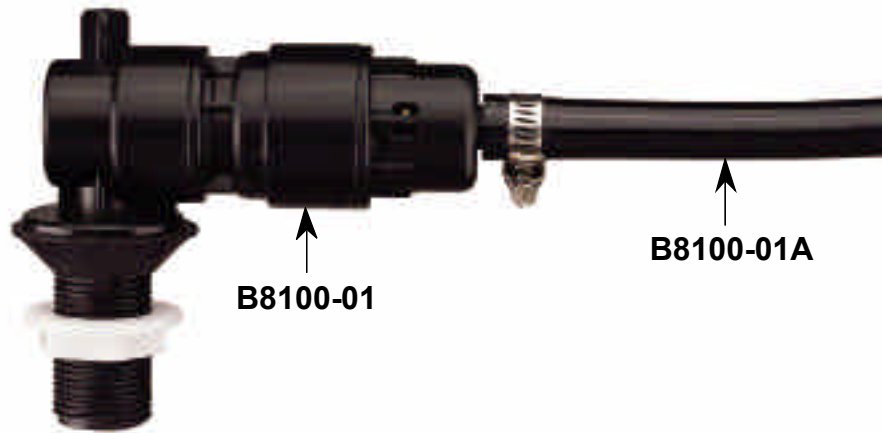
Fig. I - Exploded Parts View of Lower Inlet Supply Assembly
